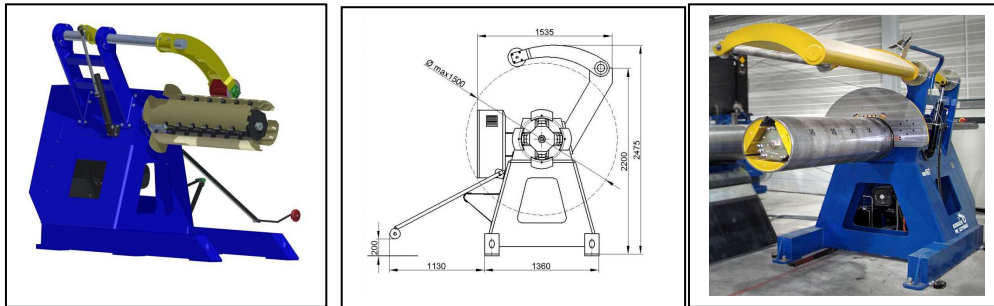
Steel sheet decoiler 3D/2D CAD model and a picture of the machine
